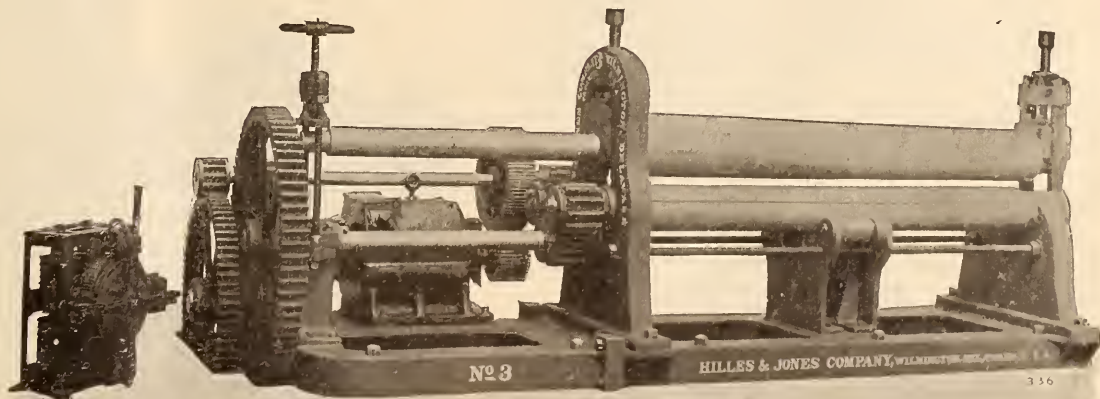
ELECTRIC MOTOR DRIVEN ROLLS MANUFACTURED BY HILLES & JONES CO.—TOP ROLL OPERATED BY HAND.
